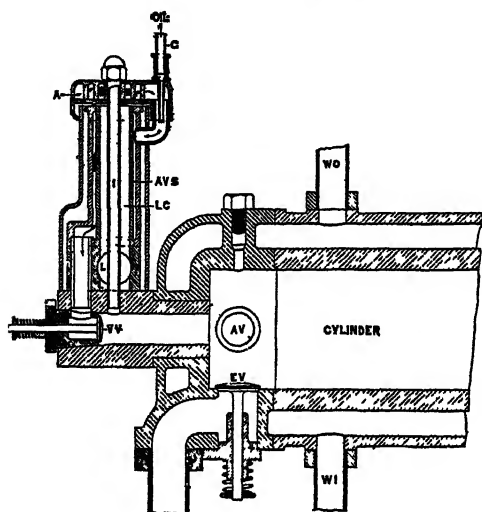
Section through vaporiser and valves in the "Blackstone" Oil-Engine.
